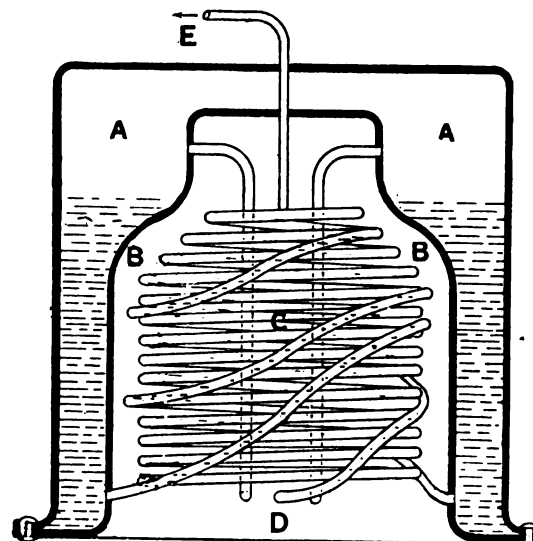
SECTION OF TOLEDO STEAM GENERATOR.
